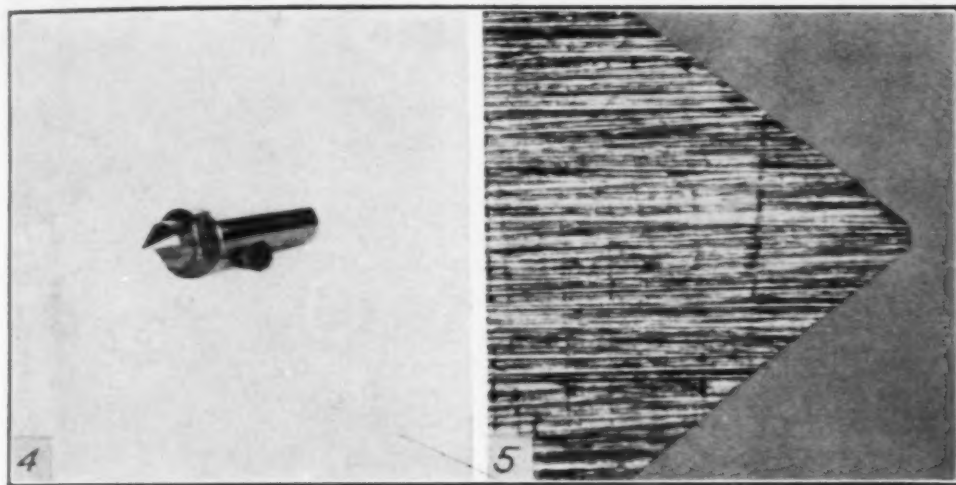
Photograph of the Cutter Used in These Tests Slightly Less than Full Size. This Cutter is Used to Shape the Die Impression.
